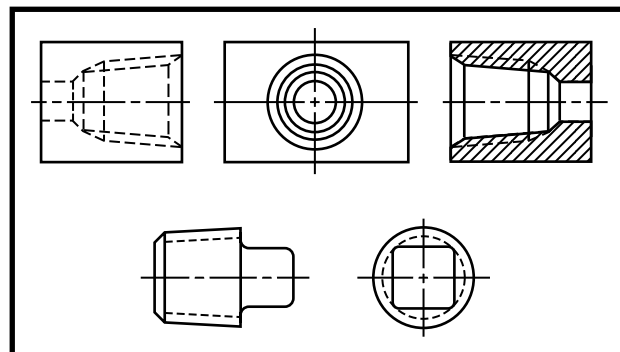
MULTIPLE THREAD REPRESENTATIONS OF ASSEMBLED PARTS
